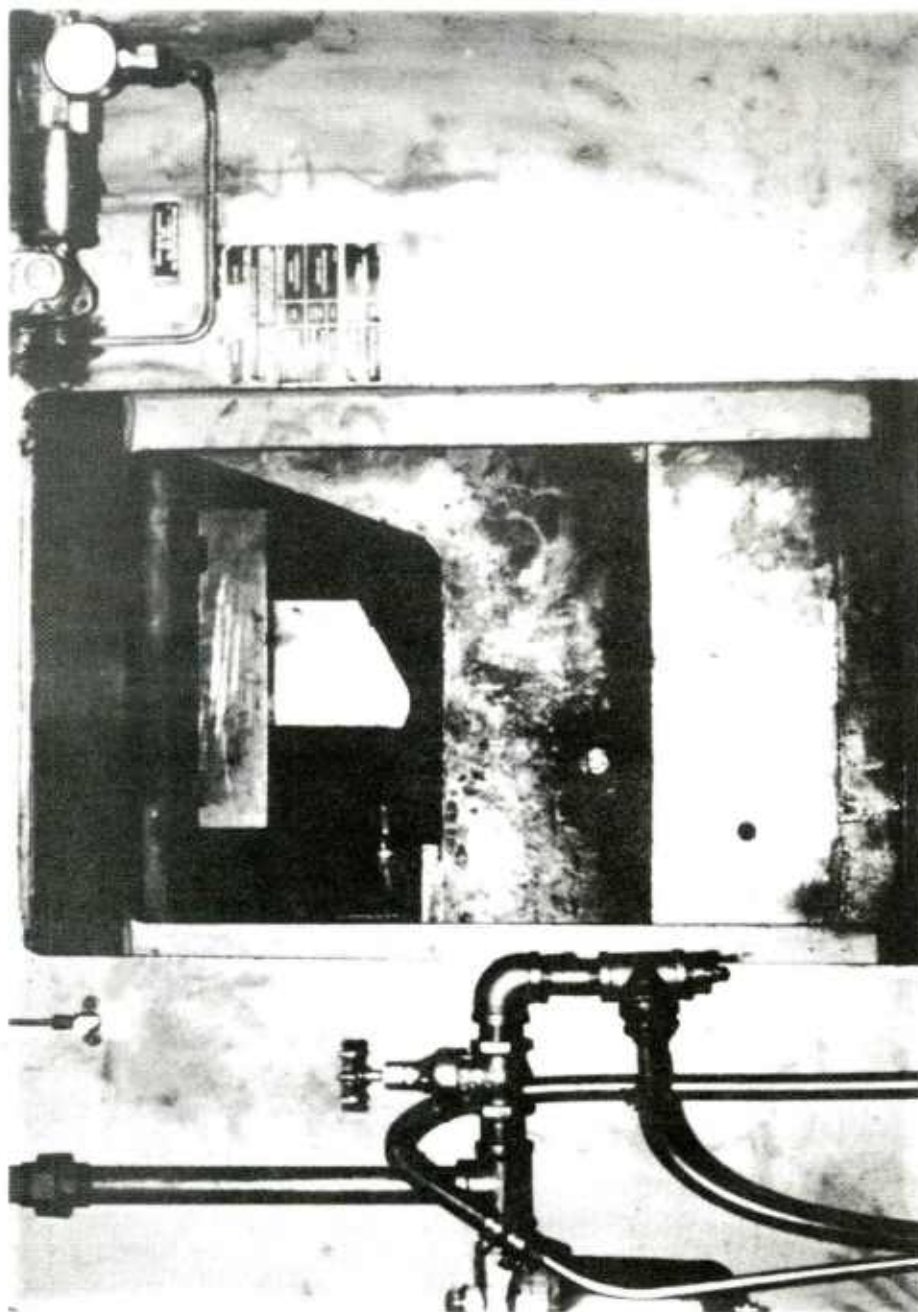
Photo depicting the tooling punch utilized on the breaker press during the "breaking" operation.
